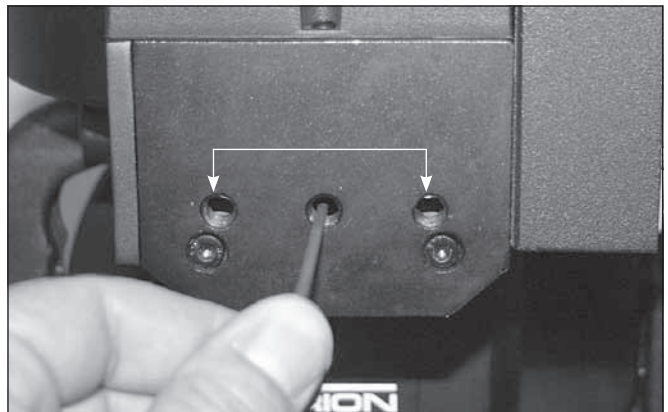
The three backlash adjustment screws are set deep inside the housing. The outer two are adjusted with a 4mm Allen key while the center screw requires a 2.5mm key. Be sure to follow the proper procedure in the text! Do not over-tighten any of the screws or you could damage the gears!
